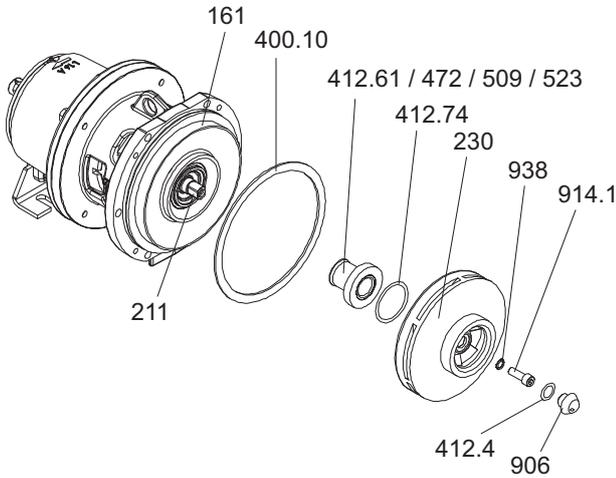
Dismounting the impeller and product-side shaft sleeve
